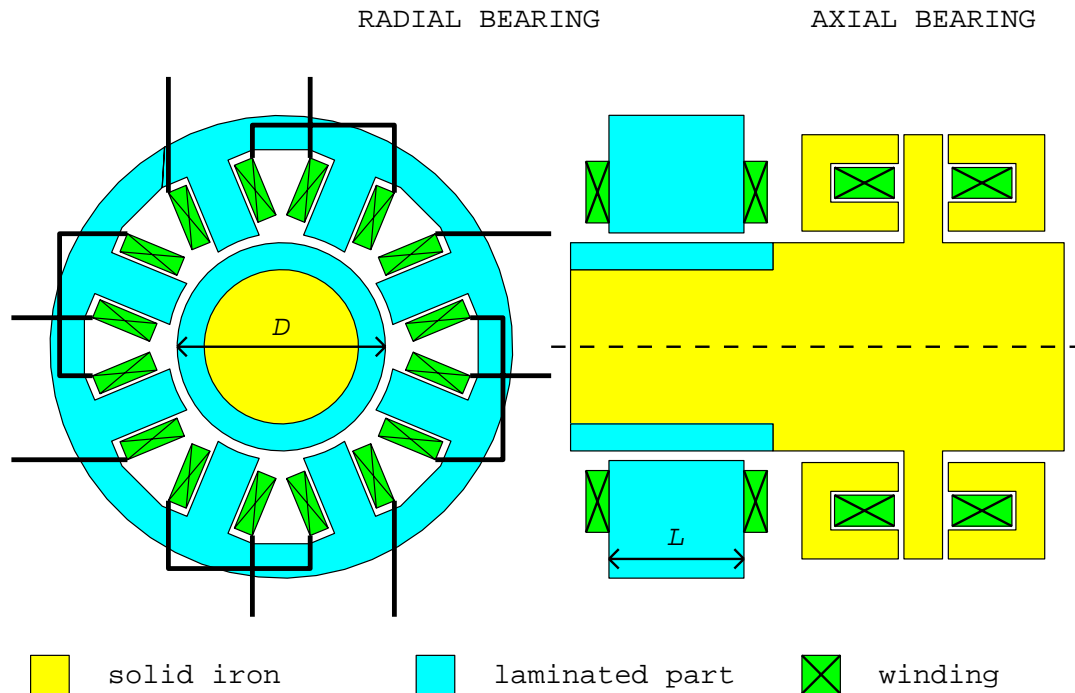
Radial eight-pole magnetic bearing and axial disc-type bearing.
